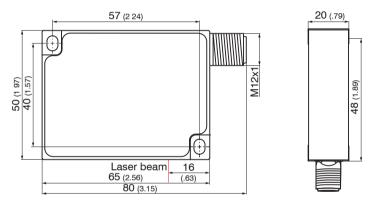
Dimensions ILD1402-xSC, dimensions in mm (inches), not to scale
